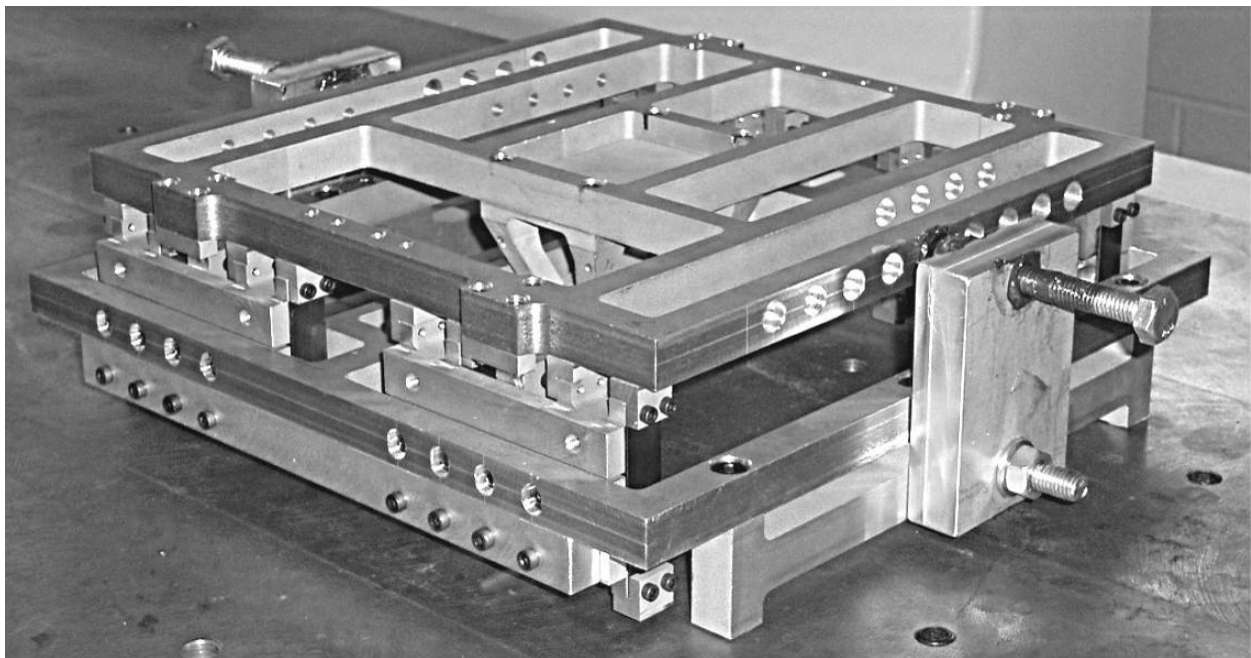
Flexure assembly as built showing with the leadscrew removed and the direct acting displacement screws fitted.
